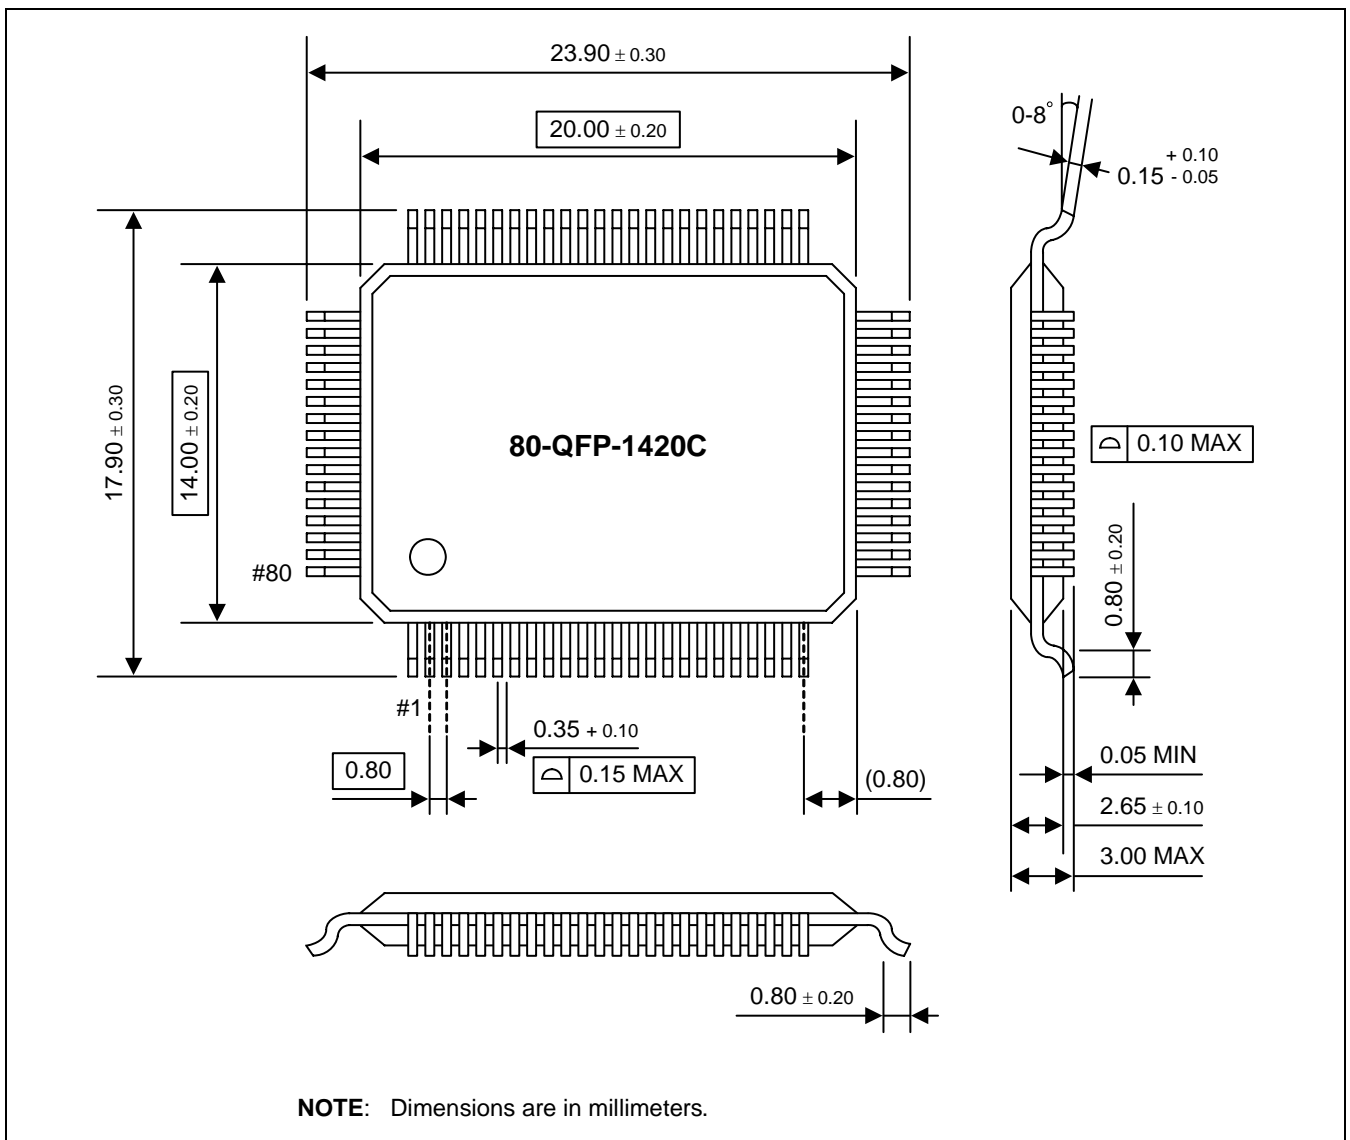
S3C84MB/F84MB 80-QFP Standard Package Dimension (in Millimeters)
